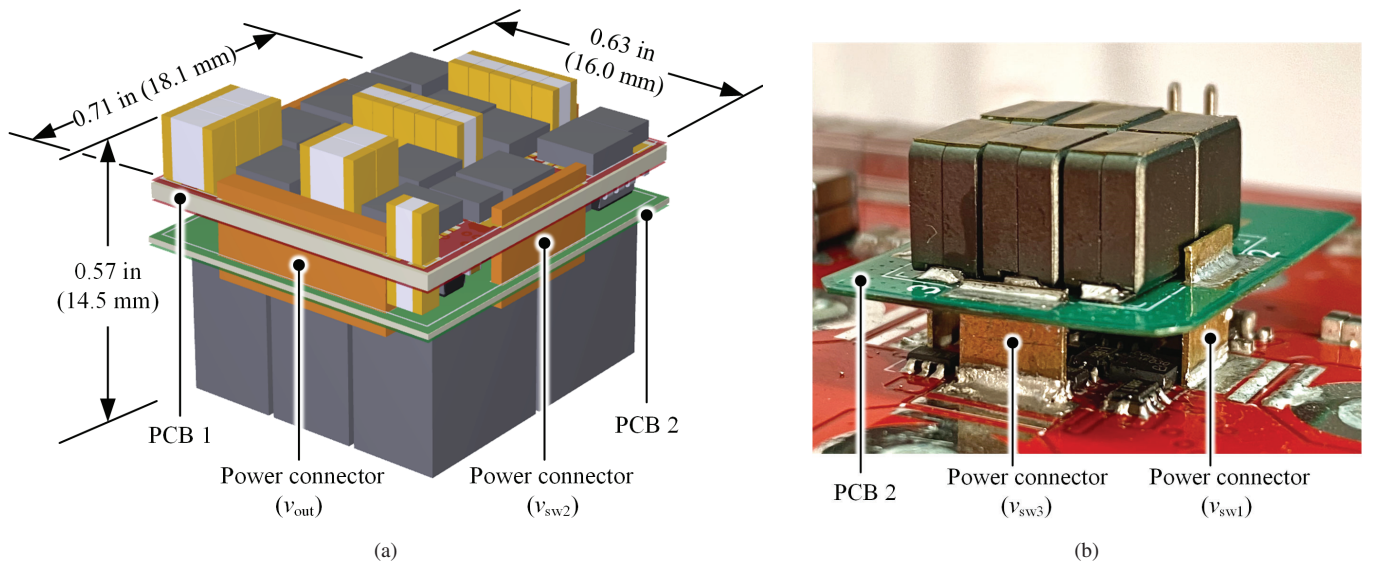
Vertical assembly of the prototype. (a) 3D assembly drawing. Dimensions: $0.71 \times 0.63 \times 0.57$ inch ($18.1 \times 16.0 \times 14.5$ mm). (b) Photograph of the power connectors in the prototype.
